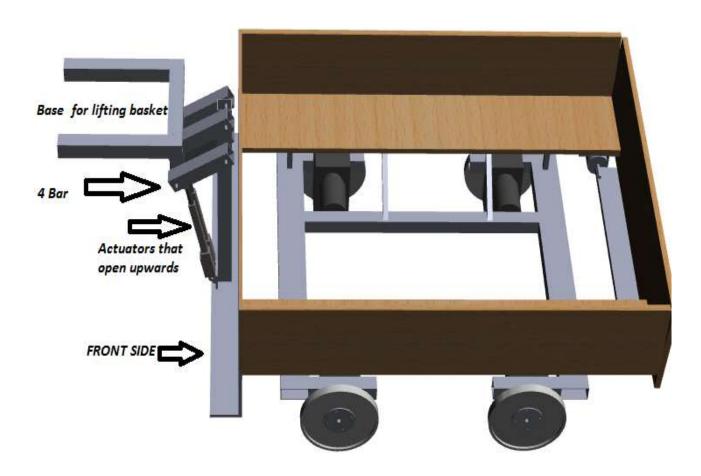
FINAL CAD OF THE AUTO BOT
